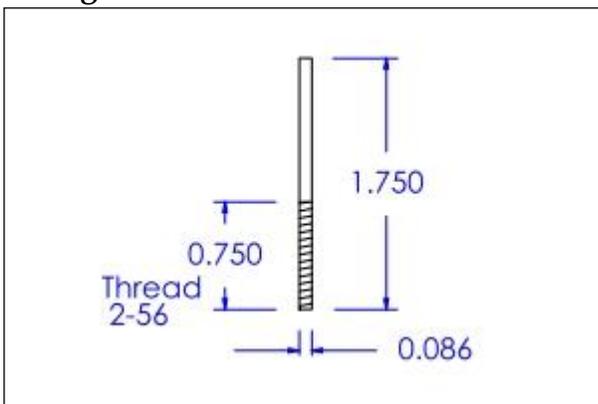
Construction drawing of the rating rod. The material used is mild steel.
